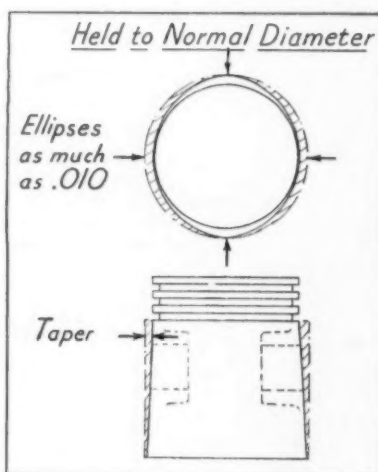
Sketch showing how the ellipse and taper are turned on the aluminum pistons.
